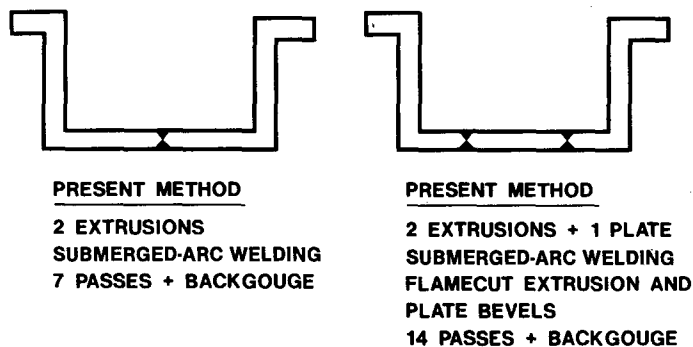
Mark 26 ready-service rings, flange-to-flange and flange-to-web butt welds
